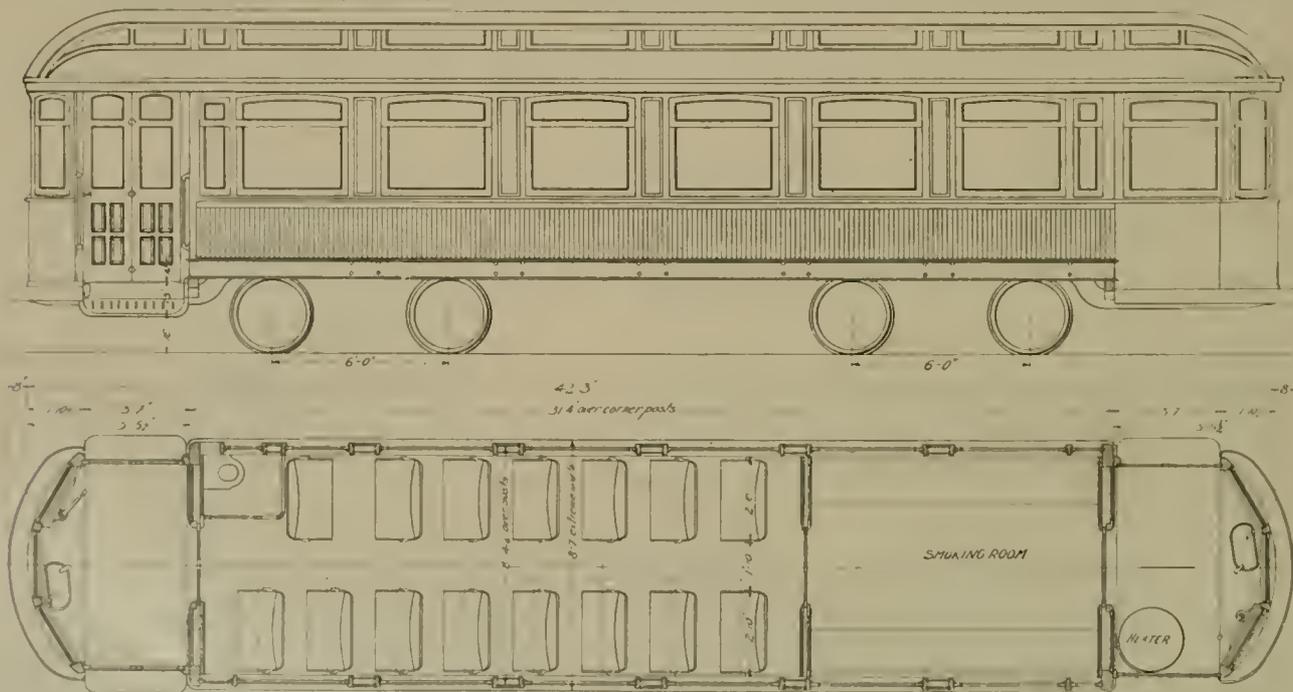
PLAN AND ELEVATION OF LARGE ROBERTSON CAR.
